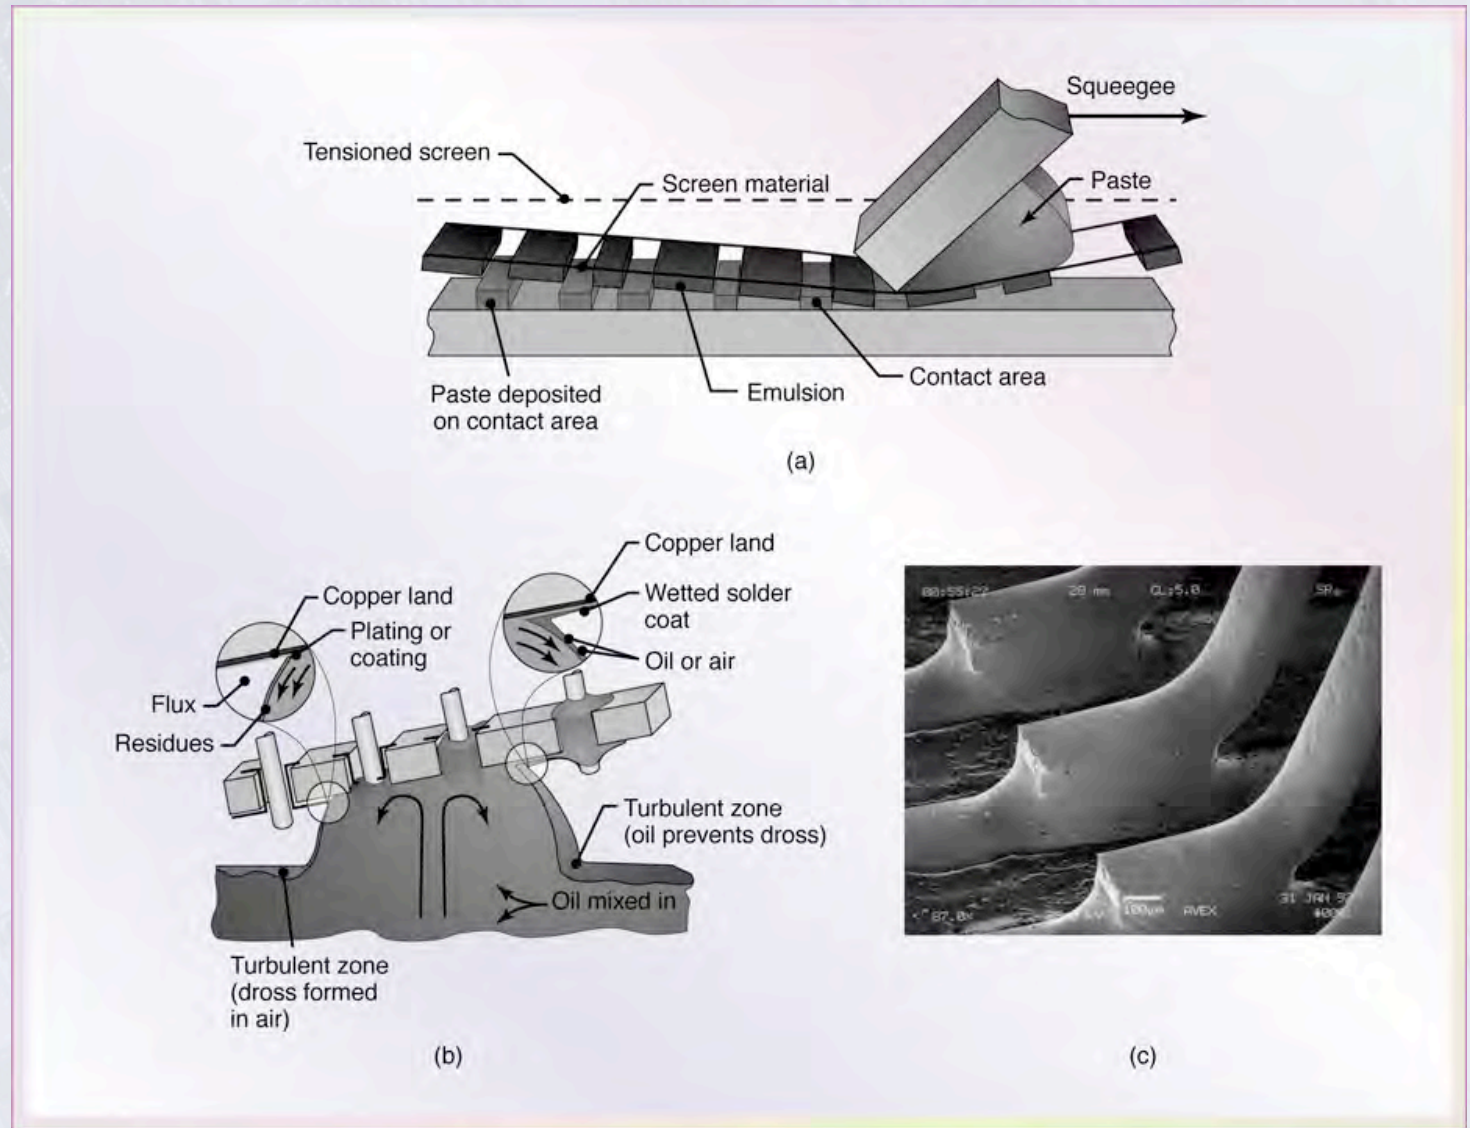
(a) Screening solder paste onto a printed circuit board in reflow soldering. (b) Schematic illustration of the wave-soldering process. (c) SEM image of a wave-soldered joint on surface-mount device. *Source:* (a) After V. Solberg.
